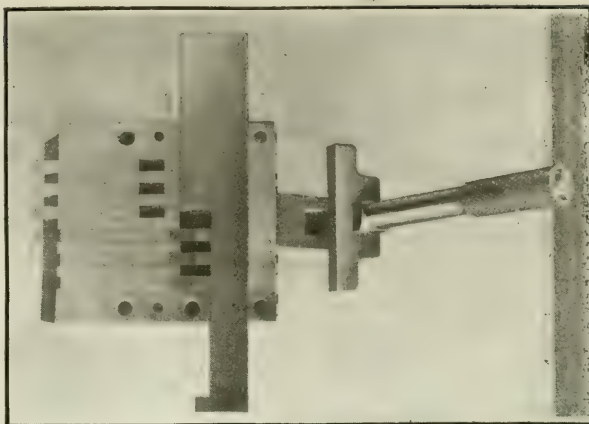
DETAIL OF THE AUTOMATIC THREADING TOOL.
